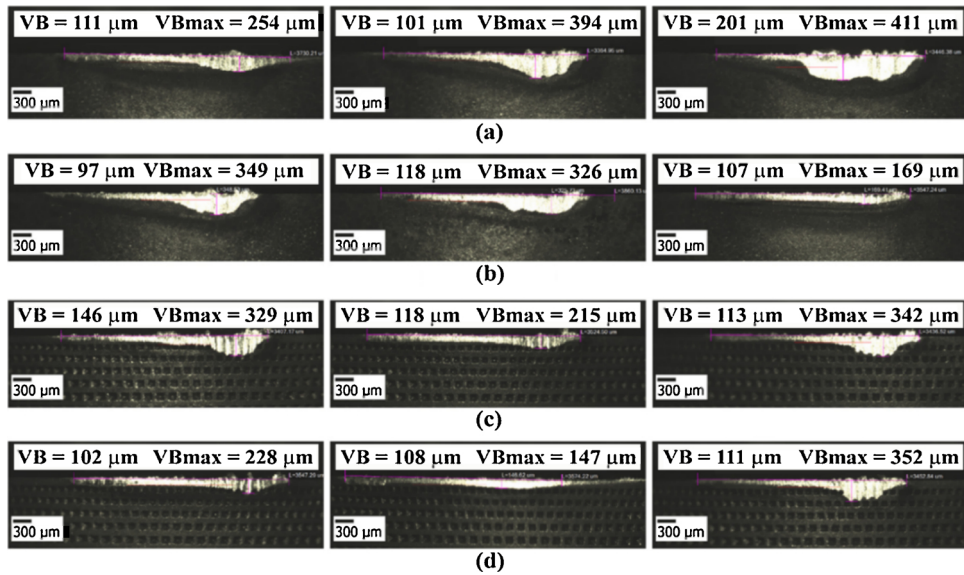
Flank wear land of inserts (a) regular, (b) Gen 0, (c) Gen I, and (d) Gen I+.
